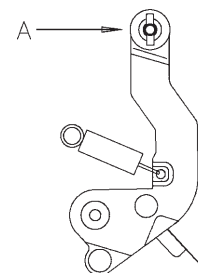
Removal of tension band when measuring the rewinding playback (VS-REW) winding torque
